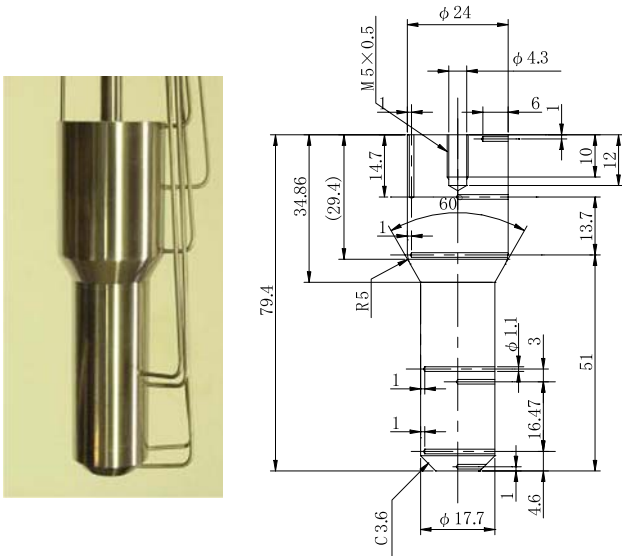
Configuration and detail dimension of SUS304 gear blank
